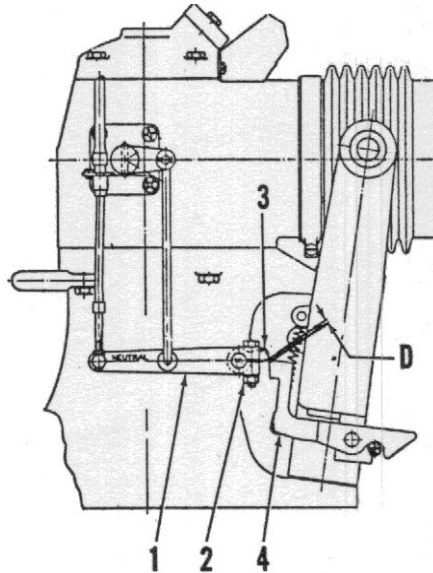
Aquamatic 100 units with parallel shift arms use a dog type clutch for shifting gears. With shift lever (1) in neutral distance between pin (3) and reverse latch (4) should be 0.020 in. (0.5 mm). Loosen clamp screw (2) to adjust.
